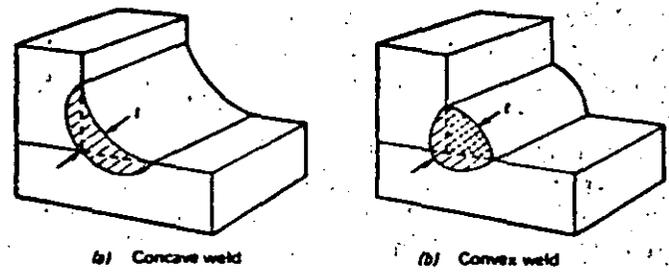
The leg size and the surface of a concave fillet weld (a) may be larger than that of a convex bead (b), but its throat, t , may be considerably smaller.
